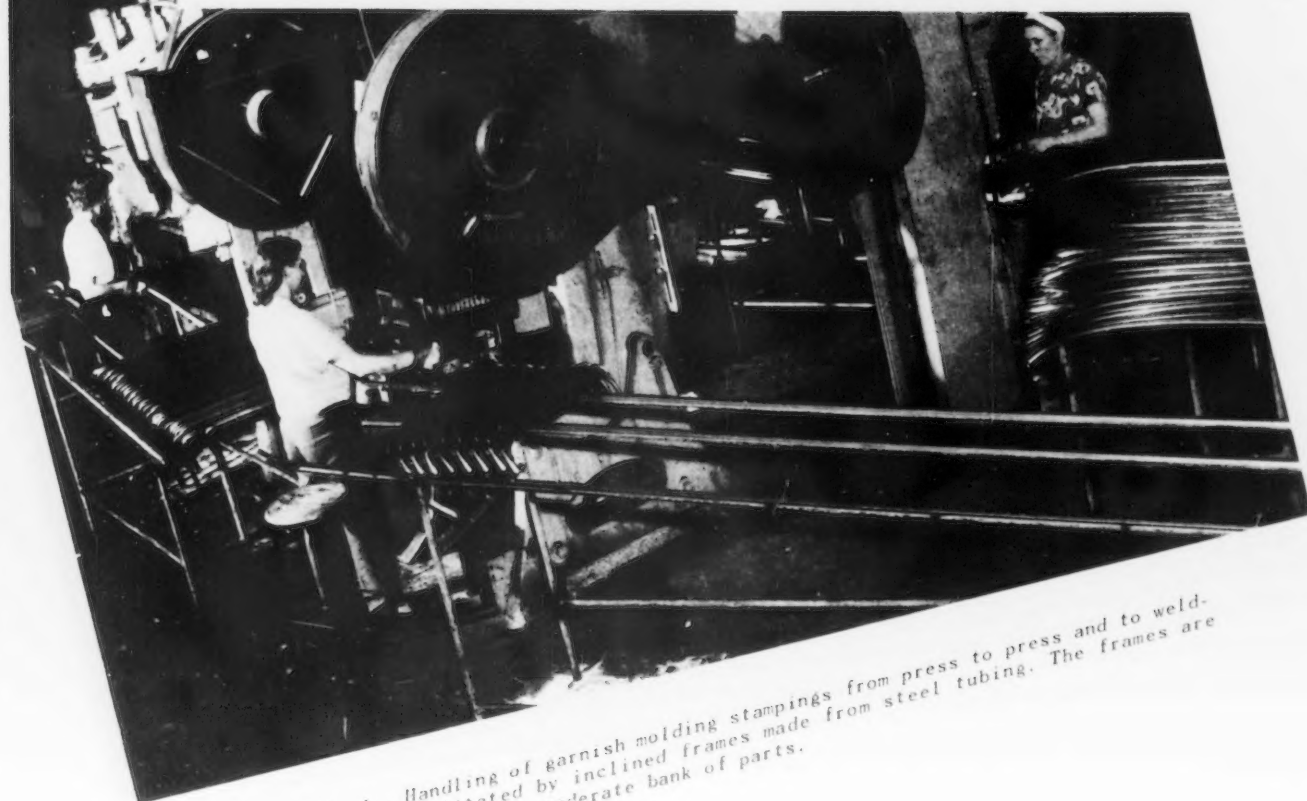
Handling of garnish molding stampings from press to press and to welders is facilitated by inclined frames made from steel tubing. The frames are designed to carry a moderate bank of parts.
